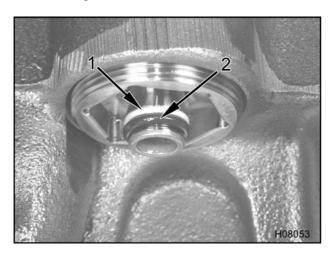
High-pressure oil manifold and brake assembly oil inlet adapter seal
